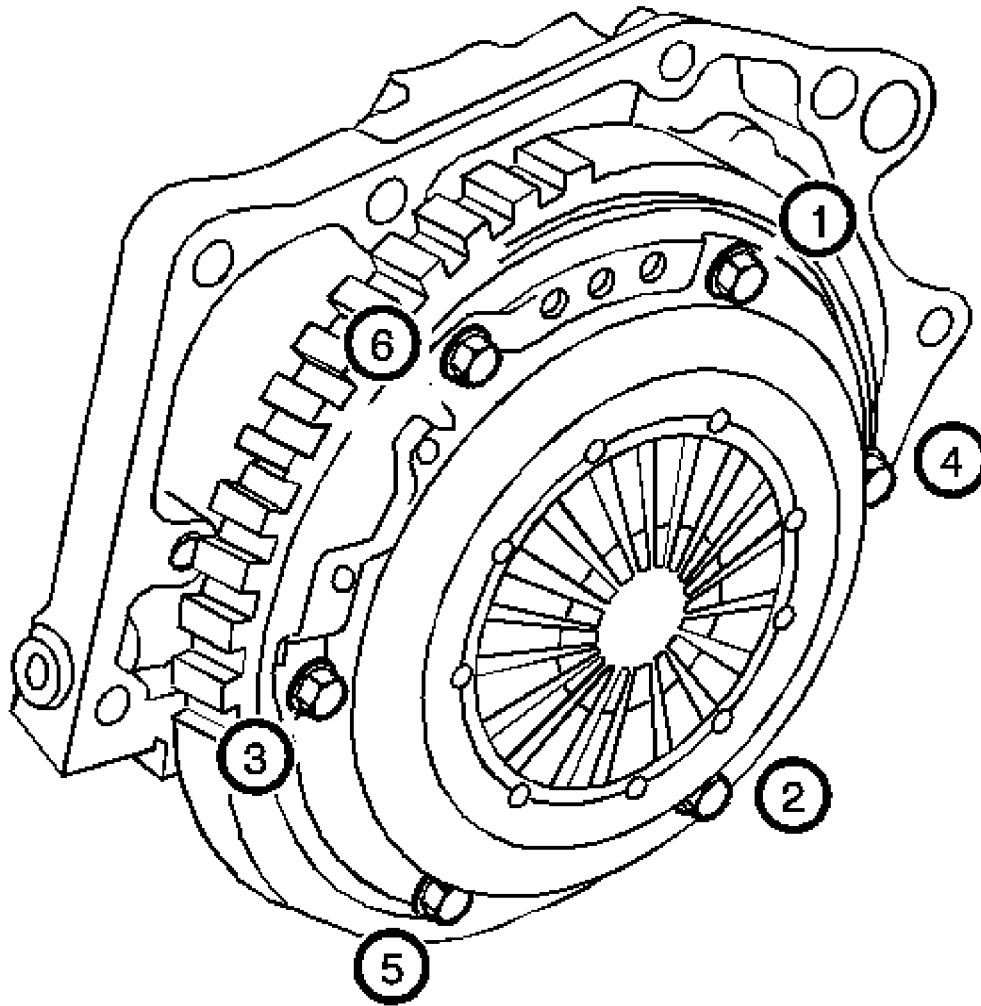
Installing Clutch Cover-To-Flywheel Bolts
